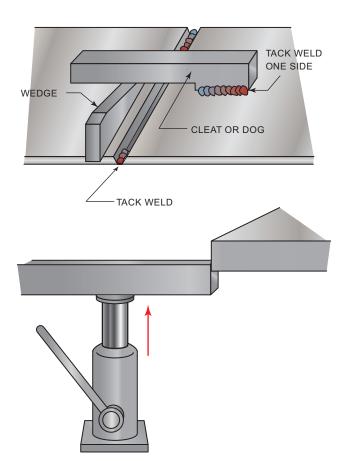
Techniques for aligning tack welds.
